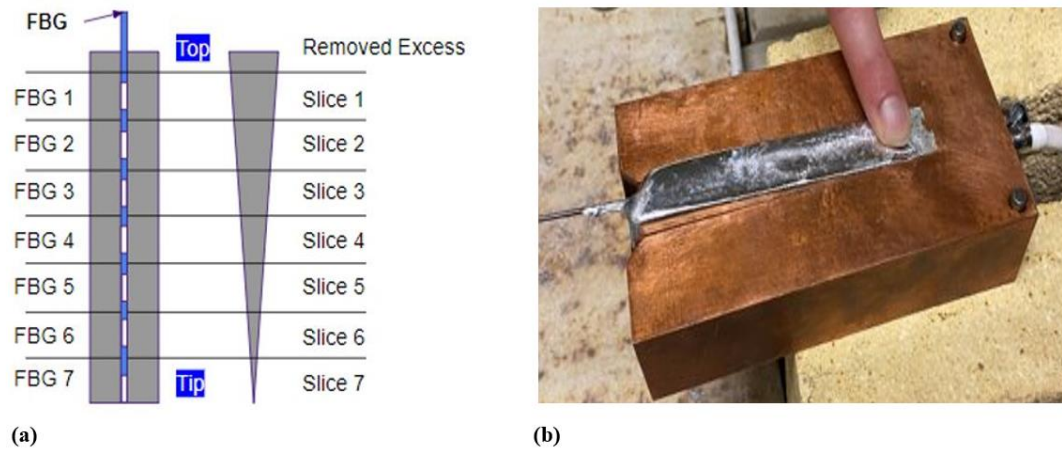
a) Front and side profiles of the wedge with indicated cut lines b) Half copper mold section with solidified alloy sample and FBG.
